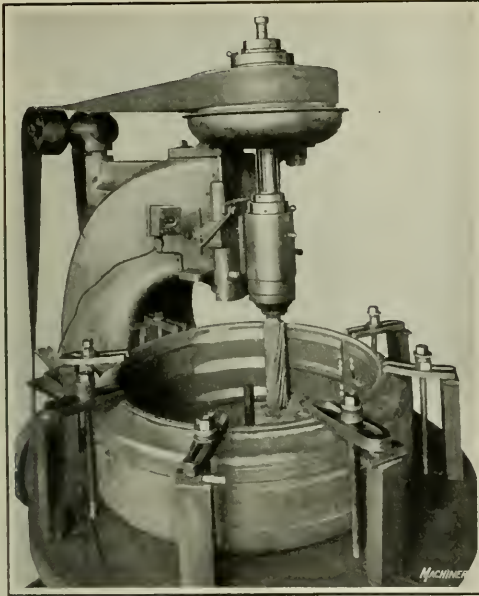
Vertical Rotary Milling Machine set up for milling Truck Tire Molds
